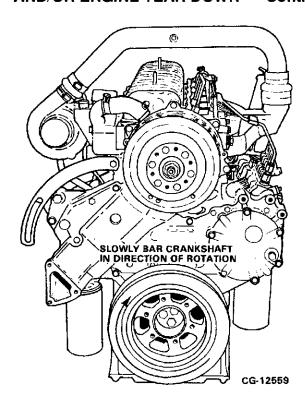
Bar Engine Until .004" Feeler Gauge is Snug
